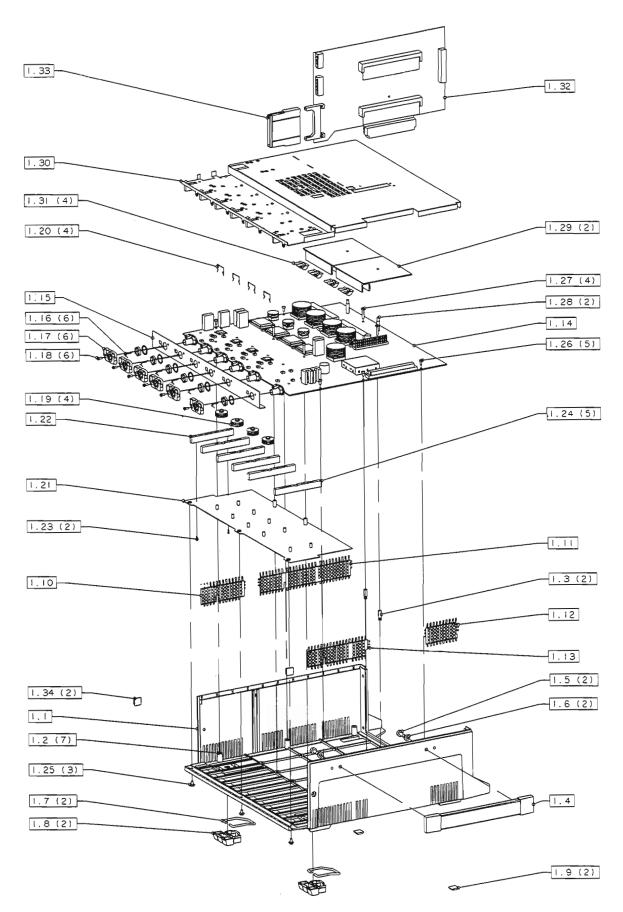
9374/M/L/TM Lower Cover Exploded View
